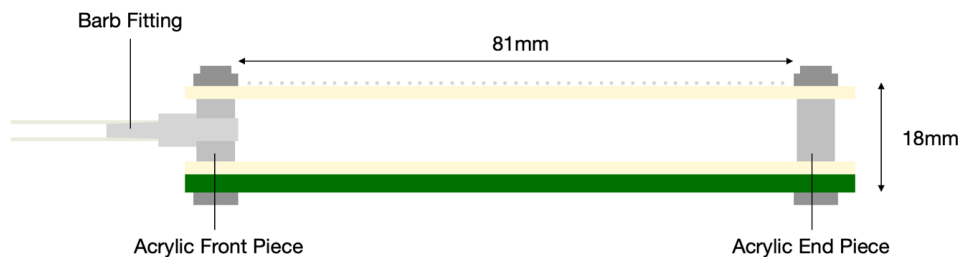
The side view and cross section of the embroidered actuator. This illustrates the various components required and how they are assembled and connected to the pneumatic system.
